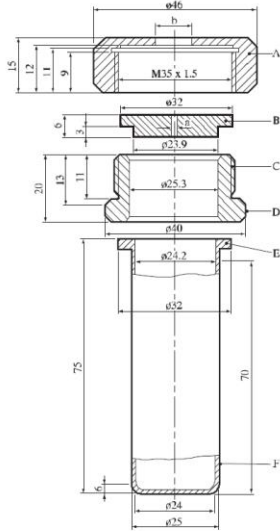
TEST TUBE ASSEMBLY
